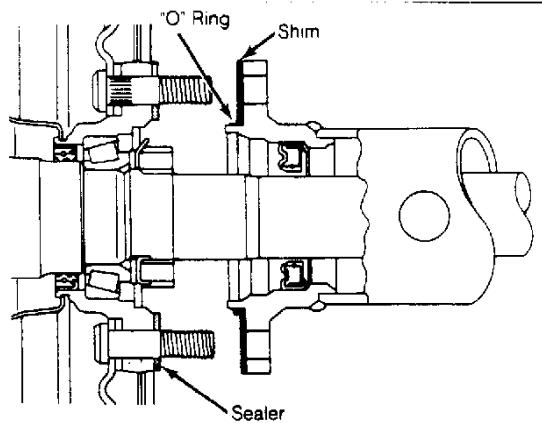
Applying Sealant (Montero, Pickup & Ram-50) Courtesy of Mitsubishi Motor Sales of America.
